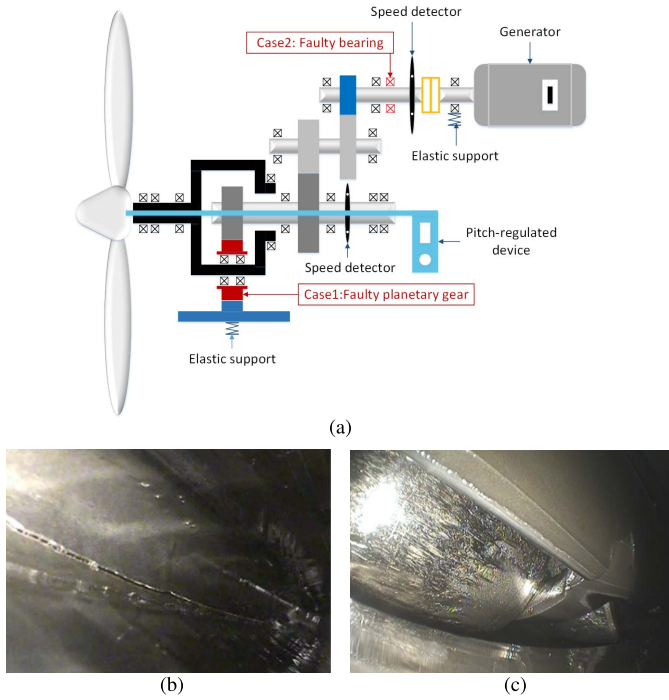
Wind turbines with two fault scenarios. (a) Schematic of the doubly fed wind turbine transmission. (b) Penetrating crack in the first-stage planetary gear. (c) Large-area wear on the rear bearing of the gearbox.
